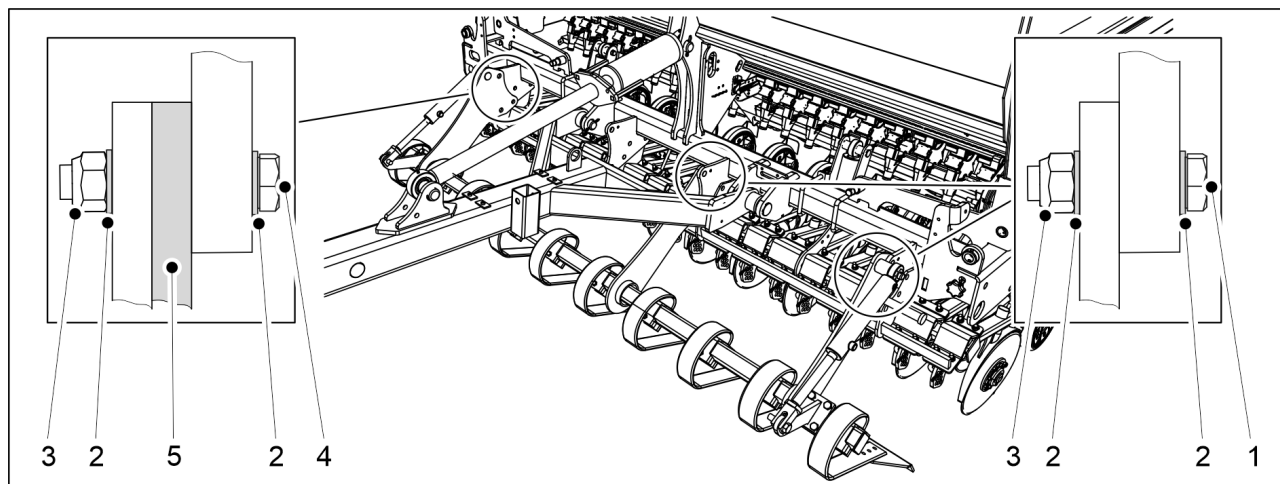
43. Mounting the front levelling board on a CEREX 300 EVO
